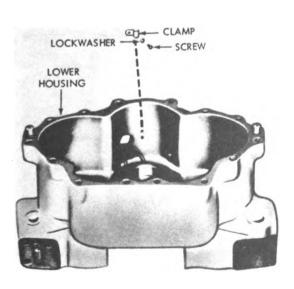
Traversing gearbox disassembly or assembly (13 of 15). Digitized by Google
